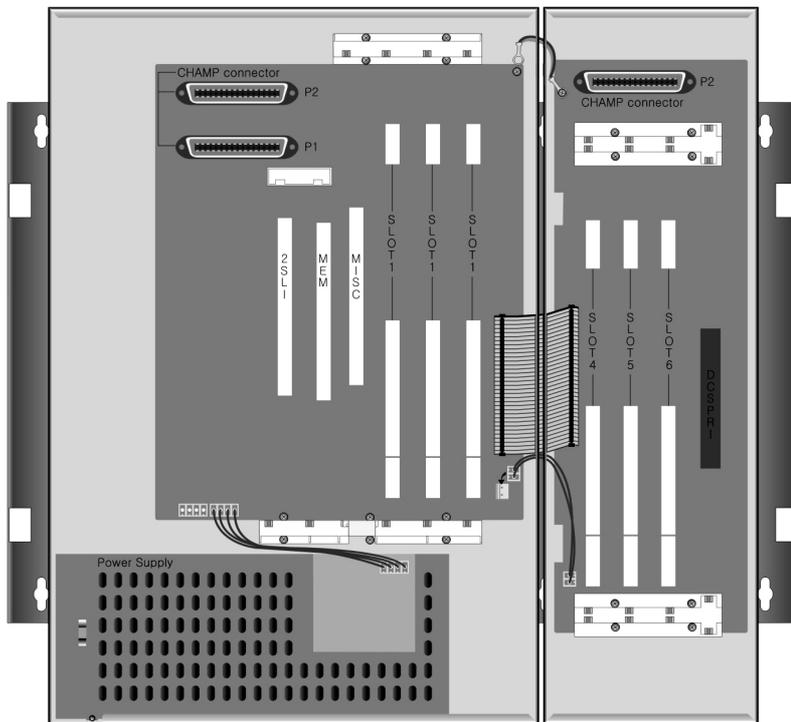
Assemble between Basic KSU & EXP.Cabinet (1)
